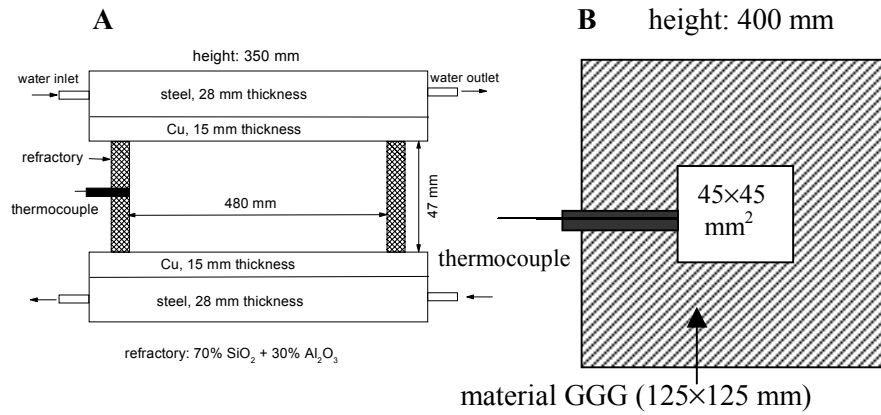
Size of casting moulds (casting mould 3-B only used for some stainless steels)
